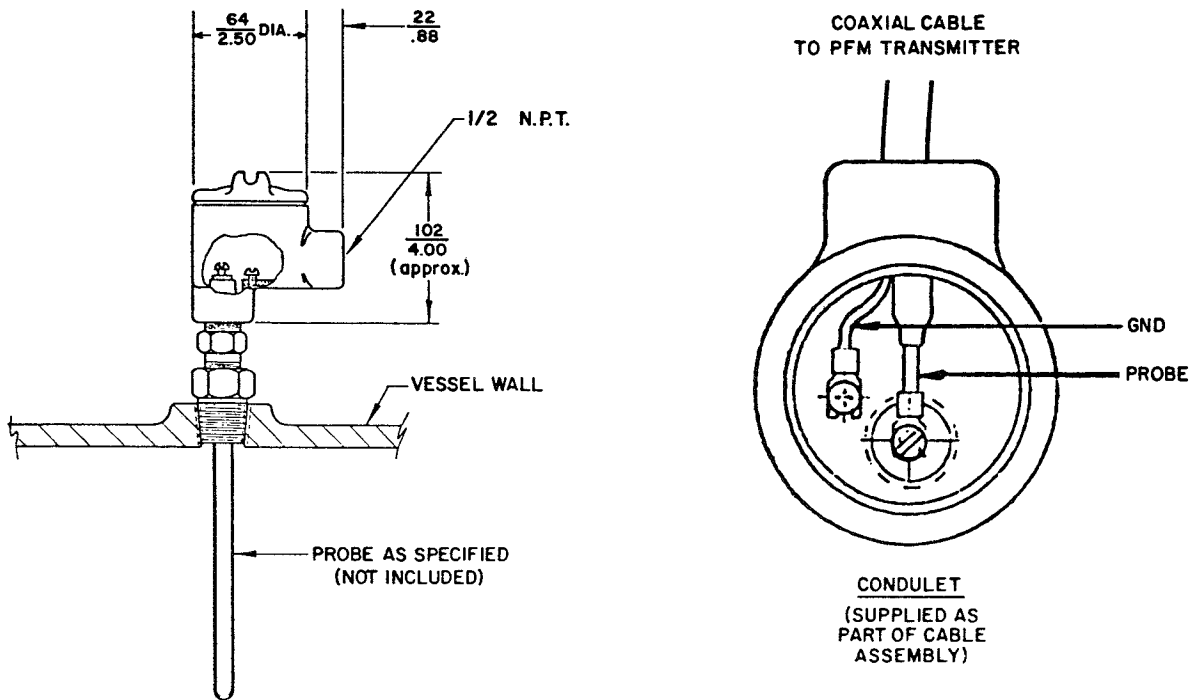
Mounting Dimensions and Electrical Connections, Remote Mounted PFM Transmitter.
